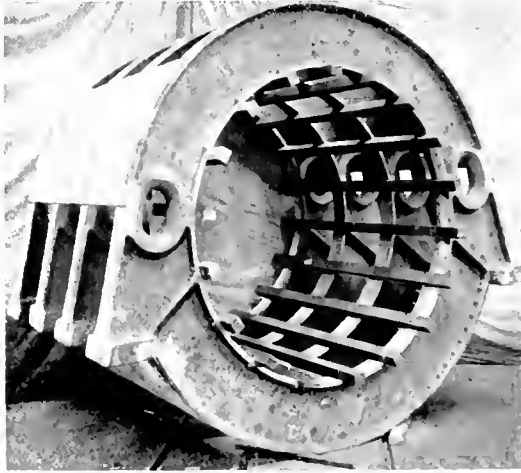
Large Turbine Generator Stator Frame Built Up of Annular "I" Sections with Boiler Plate on the Outside and Rolled Steel Ribs Inside
